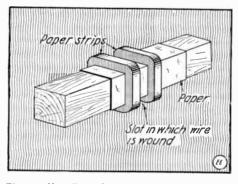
How Form Is Constructed for Winding Galvanometer Coll.
